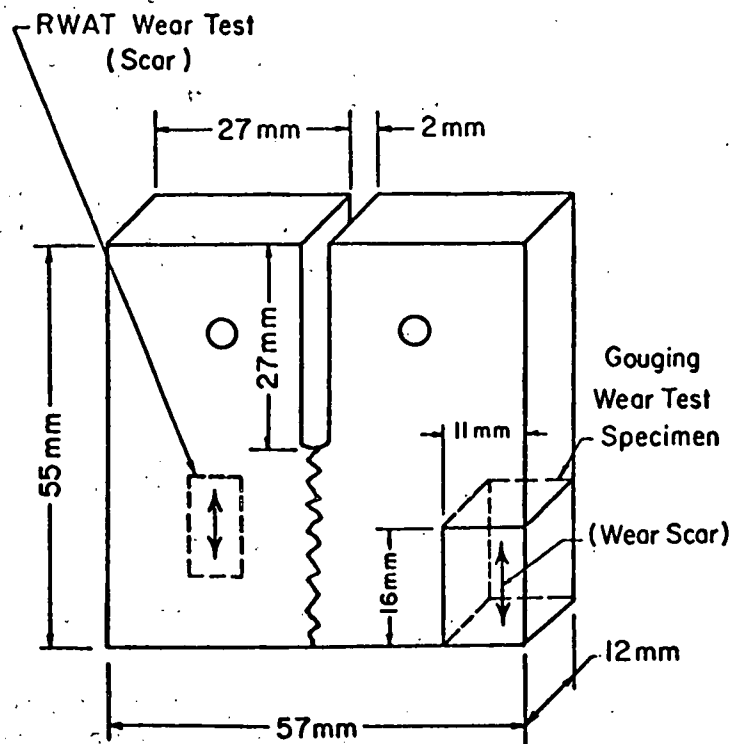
Sectioning scheme for obtaining rubber wheel and gouging wear test samples from Ni-Hard 4 fracture toughness specimen.
